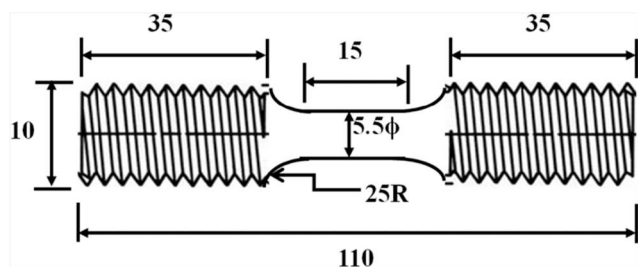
Schematic geometry of the specimen used for tensile and fatigue testing.
